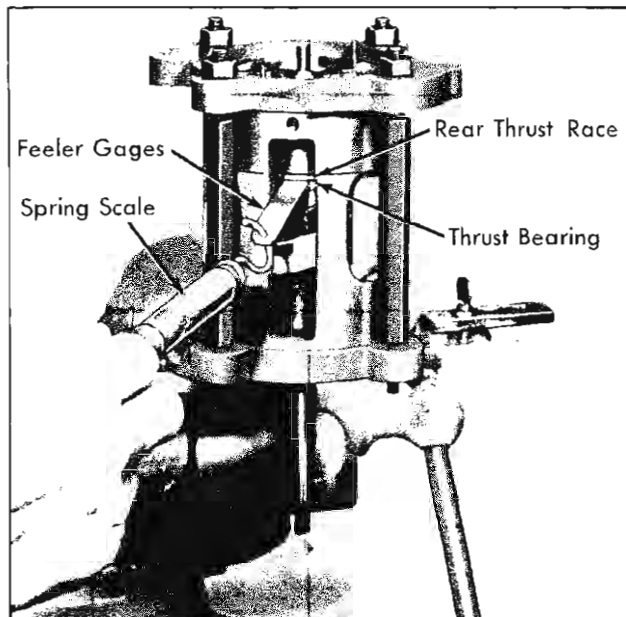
Checking Clearance Between Rear Thrust Bearing and Outer Thrust Race
